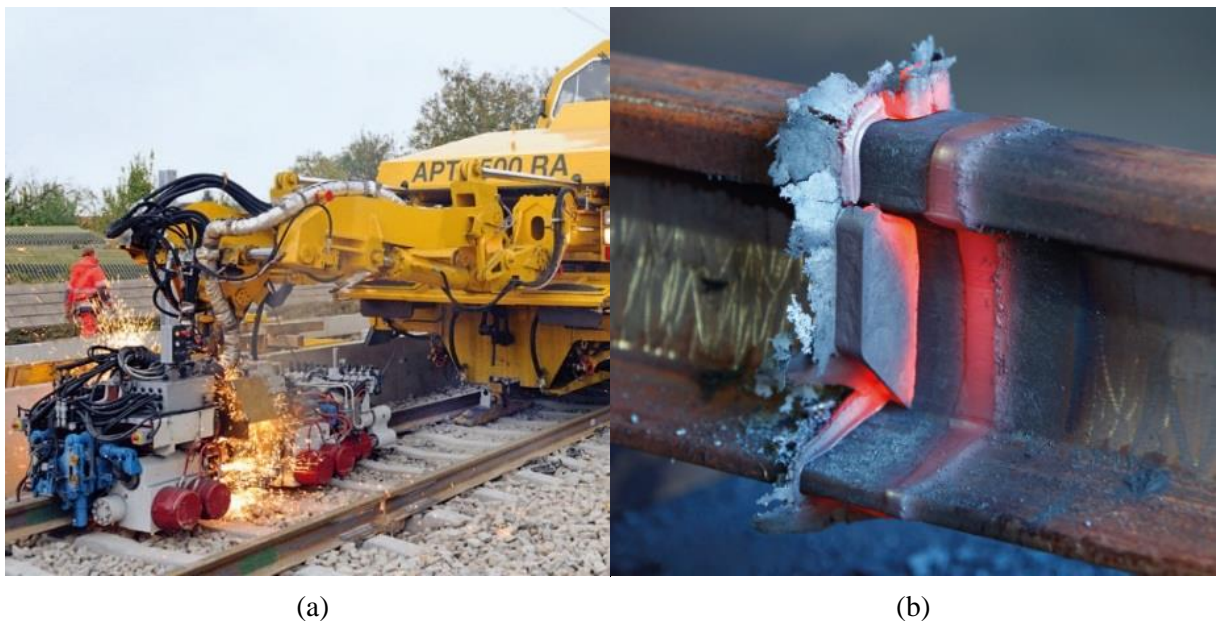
(a) Mobile flash butt welding machine (Plasser South Africa, 2015) (b) New FBW (Lekule, 2015)
